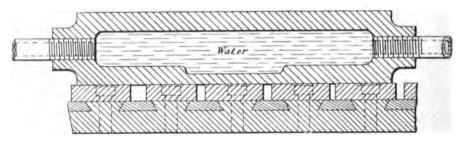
Wicks rotary typecaster; hard moulds. Scale: full size.
